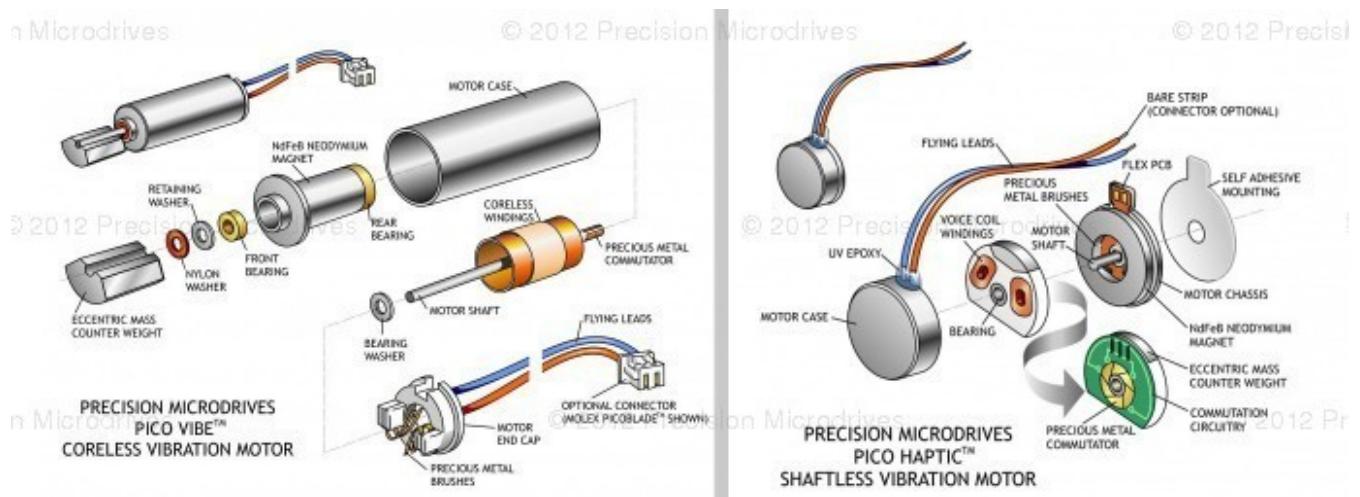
Exploded view of a cylindrical shaped ERM and a « pancake » ERM
